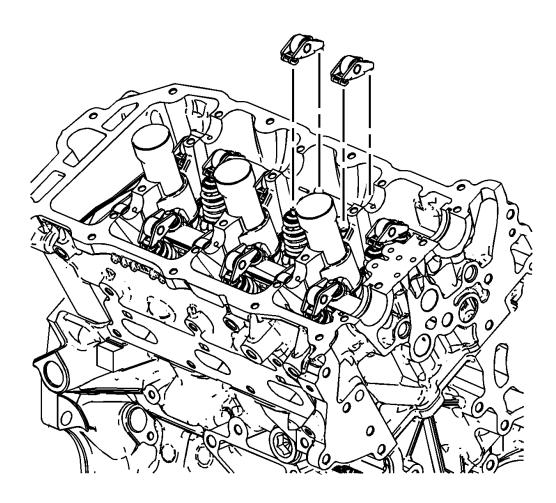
Identifying Valve Rocker Arms Courtesy of GENERAL MOTORS COMPANY
